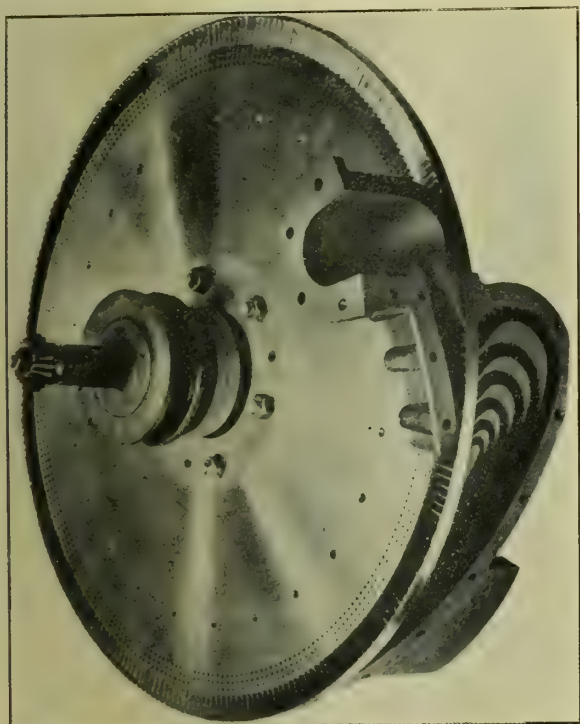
TURBINE WITH NOZZLE BLOCK AND REVERSING CHAMBER.
